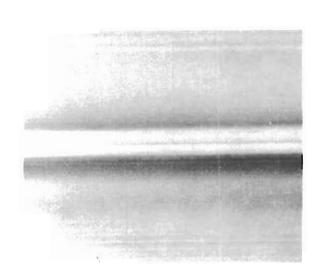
As-Extruded Surface of Full-Length Pressed and Sintered
